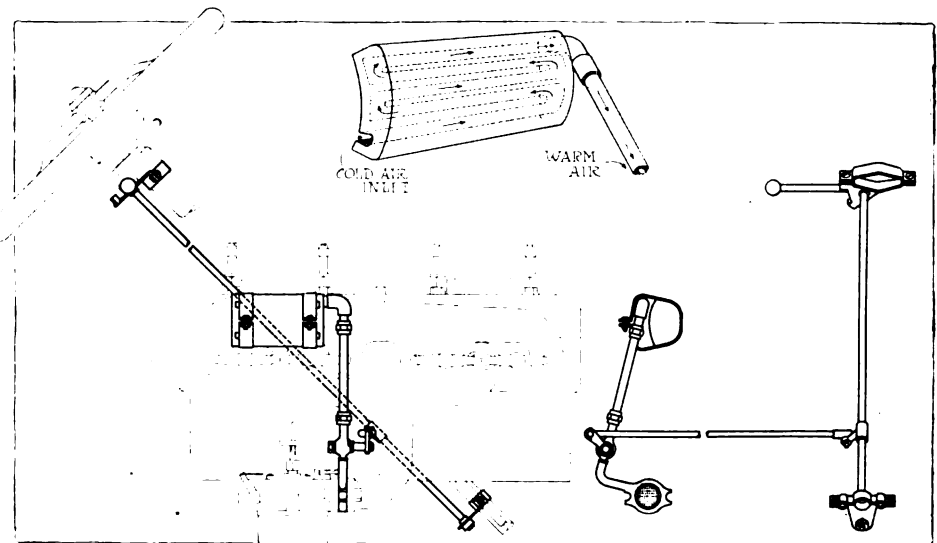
Hartford economizer for Ford cars. Jets of hot air are drawn into the manifold. A 35 per cent. saving of fuel is guaranteed
